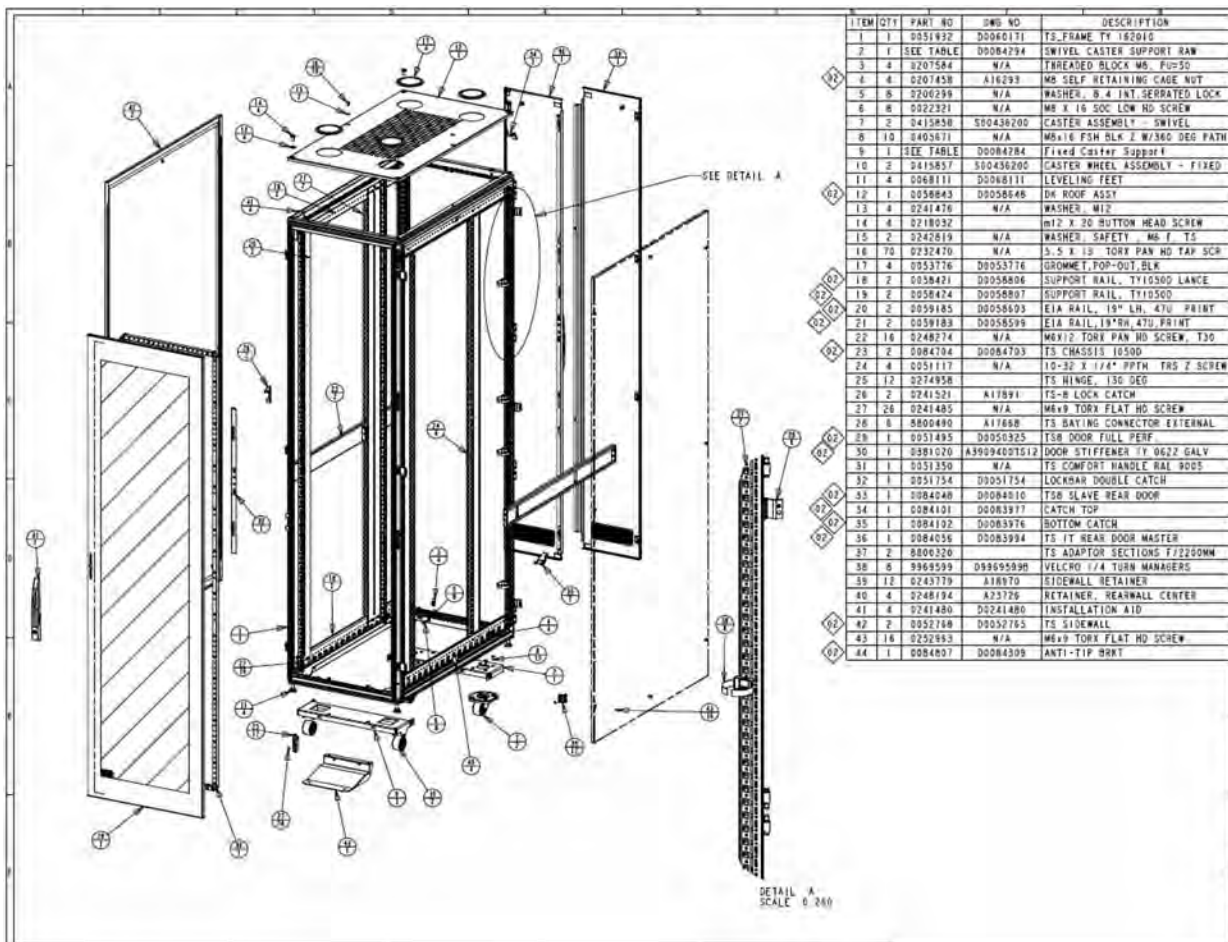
Exploded View of the Hitachi AMS 47U Rack
